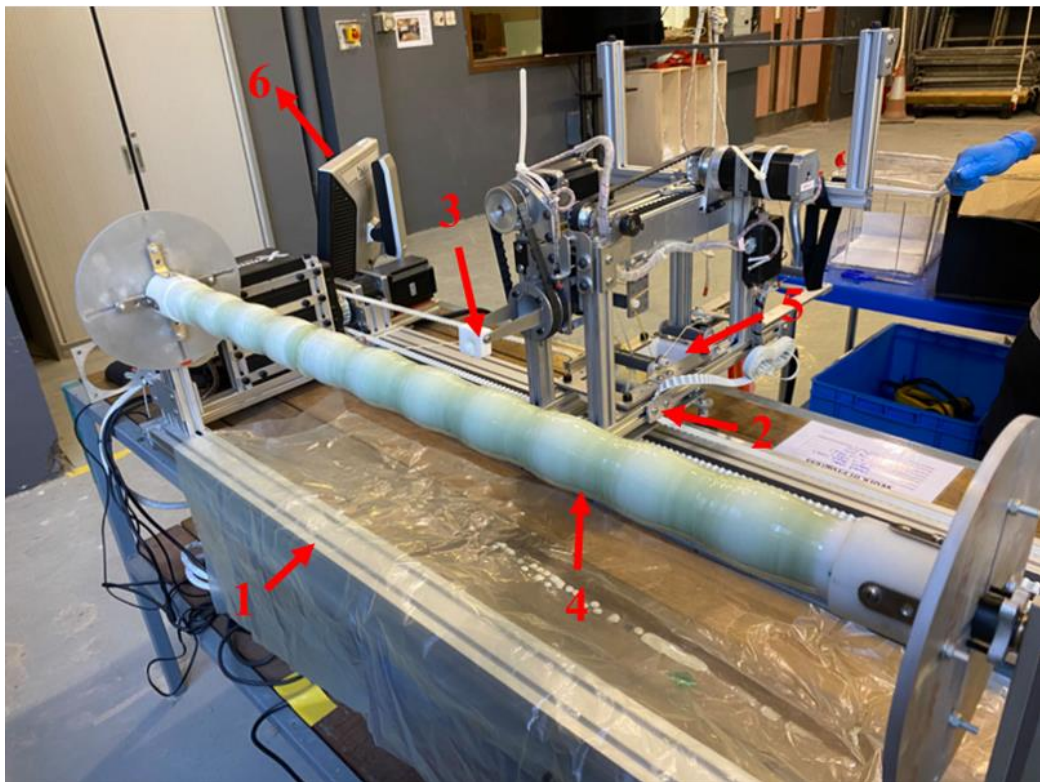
X-winder winding machine 4X-23: (1) aluminium frame; (2) carriage; (3) payout eye; (4) mandrel; (5) resin bath; (6) computer controller
